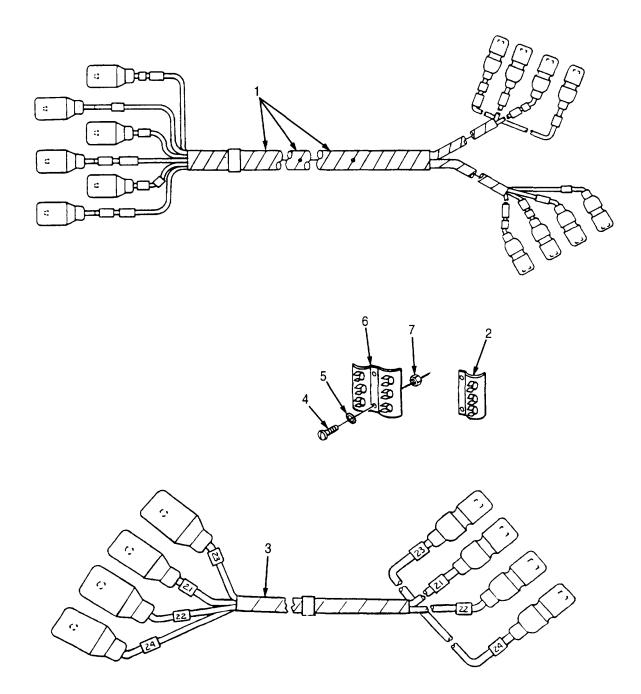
Chassis Wiring Harness (Composite Stoplight-Taillight)
